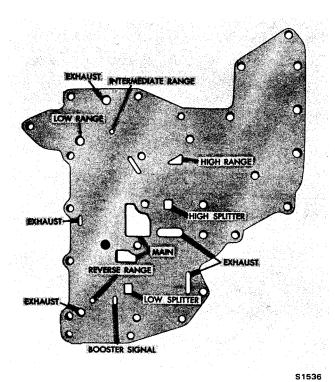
Outer side of oil transfer plate (5660, 5860)—oil passages
